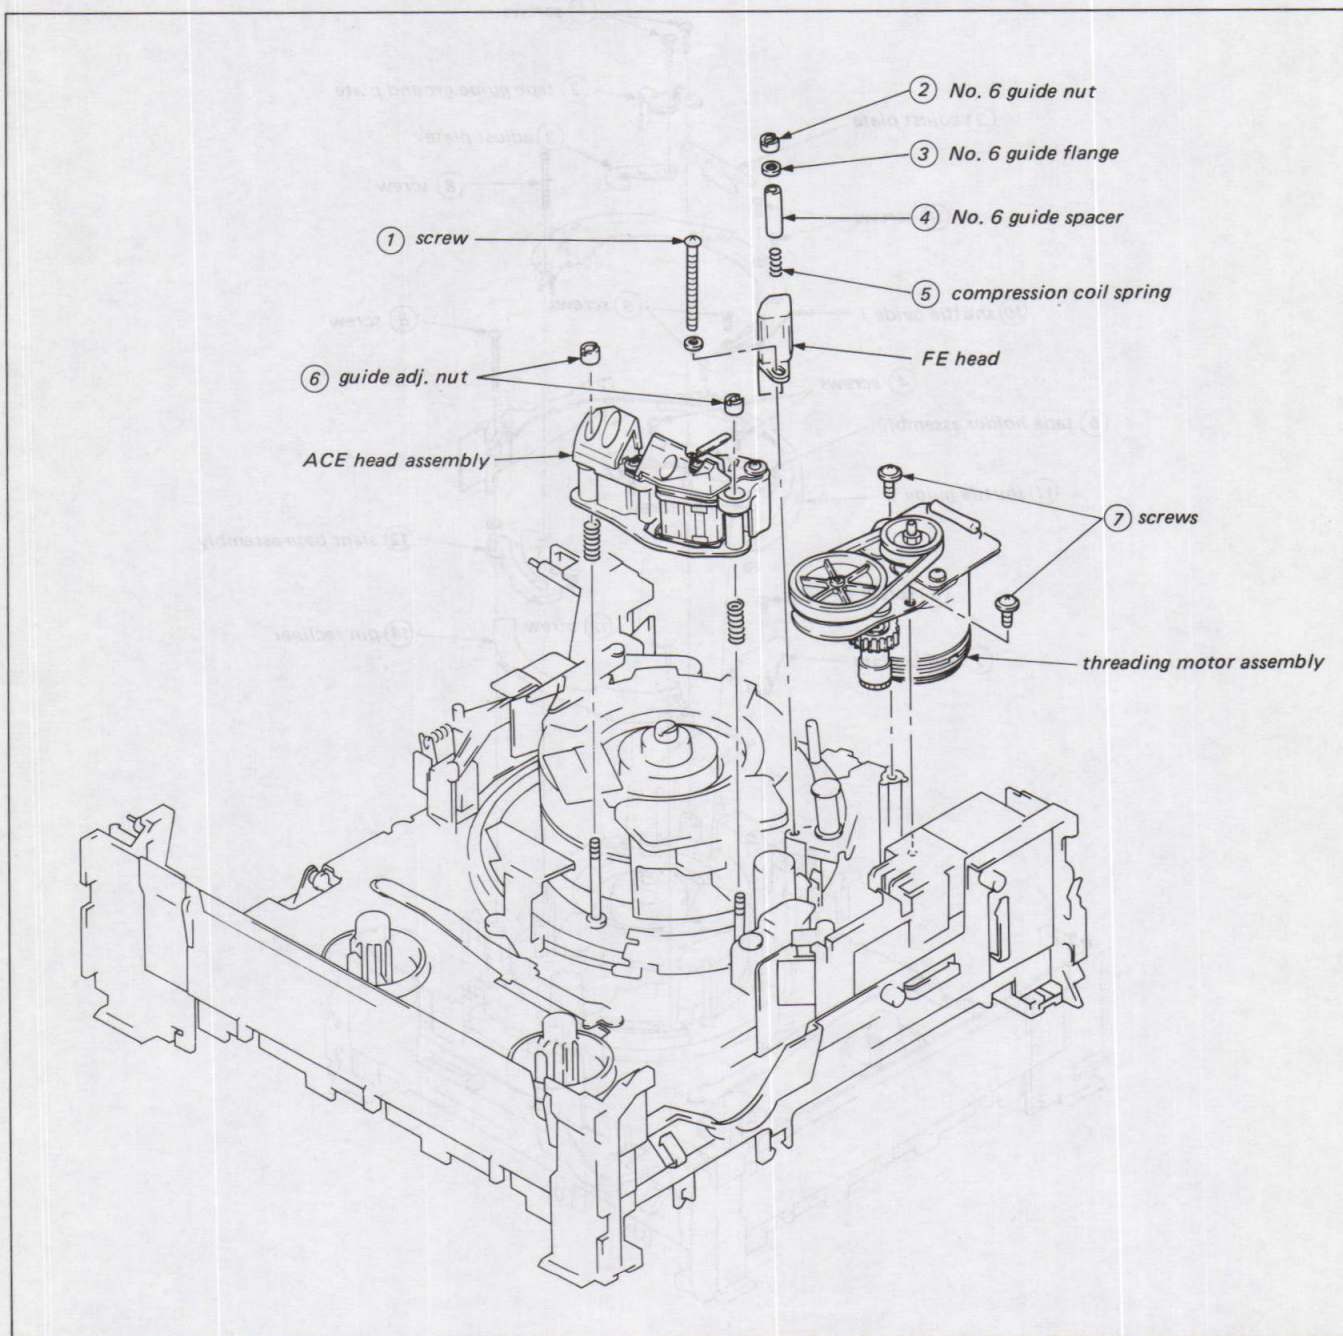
Removal of ACE head assembly, FE head and threading motor
